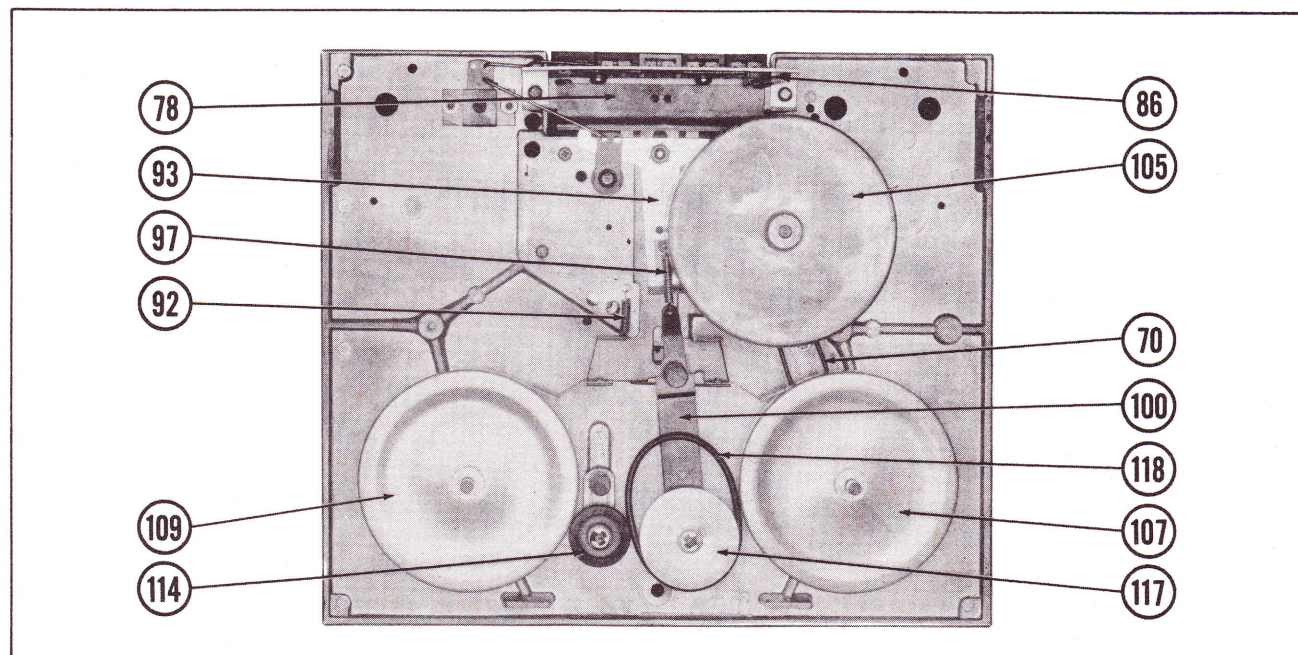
Bottom view of transport mechanism - motor mounting plate removed.
